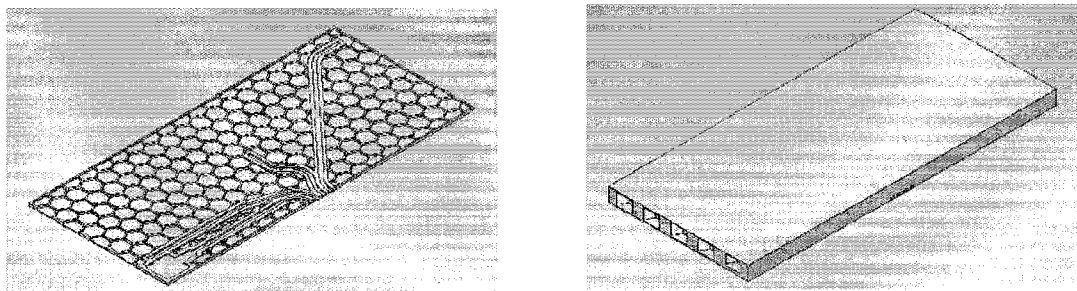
CAD models of the benchmark panel, the left shows the harnessing layout and the right shows the panel completed with a skin included
